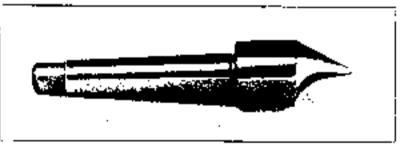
Half Male Center — head is hardened, ²⁷ ag" diameter, half cut away leaving small point, to provide clearance for turning tool when facing ends of work. Also useful for external grinding
